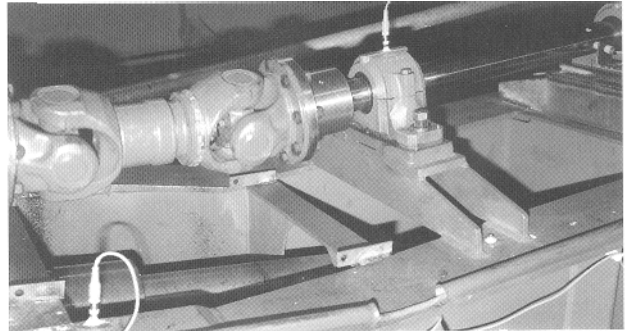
B 12 Acceleration Transducer on the shaft bearing and the bed of the gearbox
